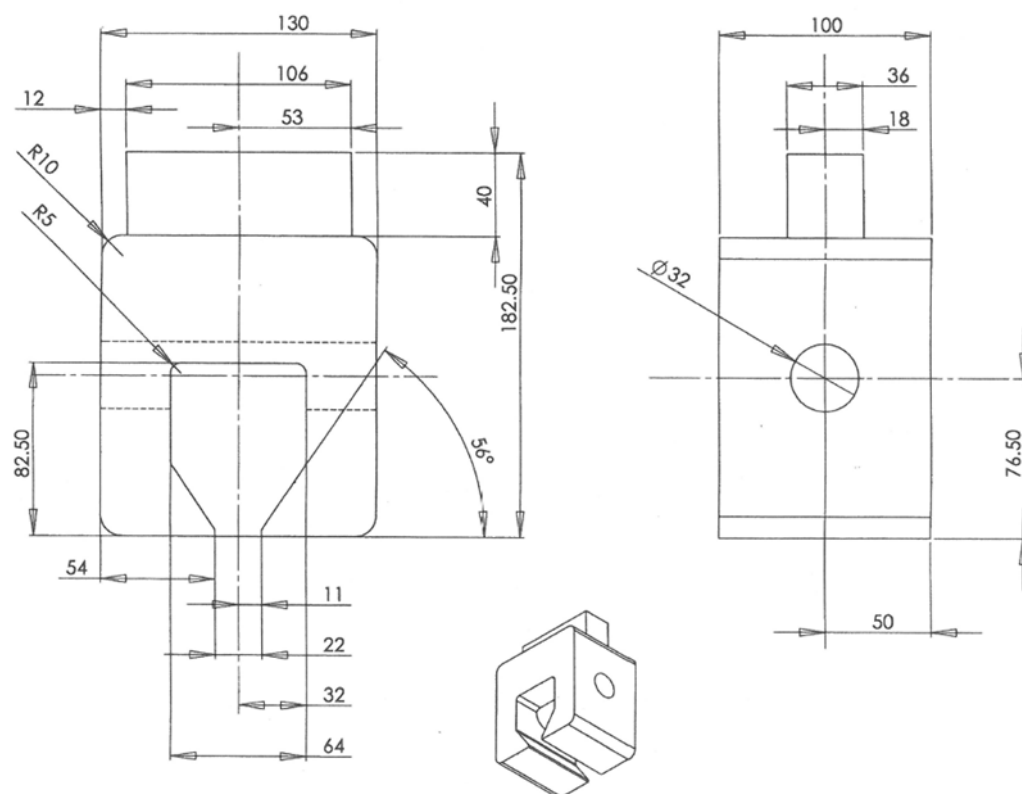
Design drawing of one of the grip fixtures for use with the dumbbells [17]. All dimensions in mm.
